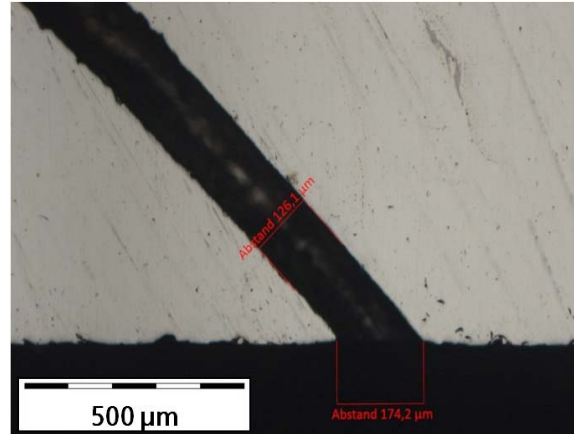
Close up view of a longitudinal section of a hole exit due to Fig. 7.
